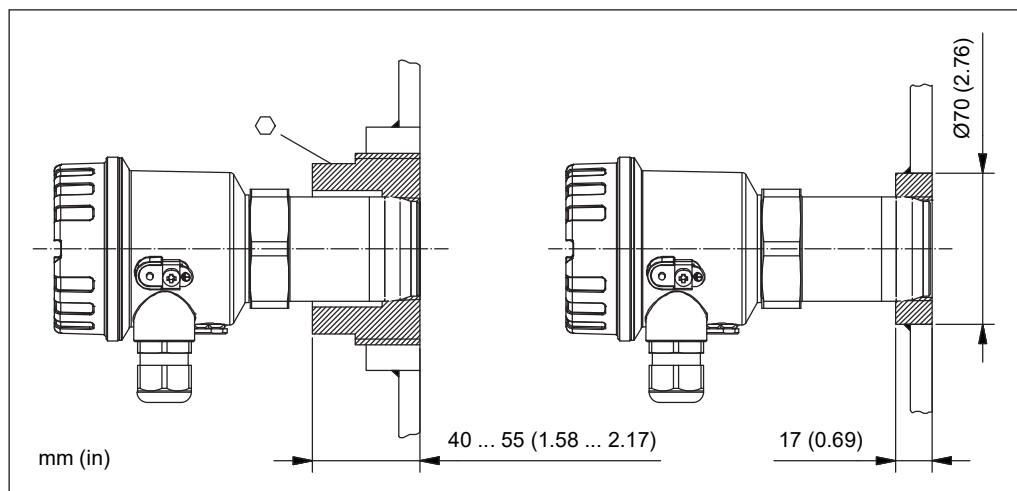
Dimensions of weld-in or screw-in adapter FAR52
